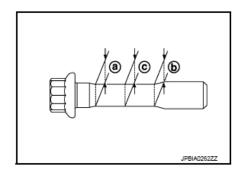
Identifying Connecting Rod Bolt Outer Diameter Measurement Points Courtesy of NISSAN NORTH AMERICA, INC.
